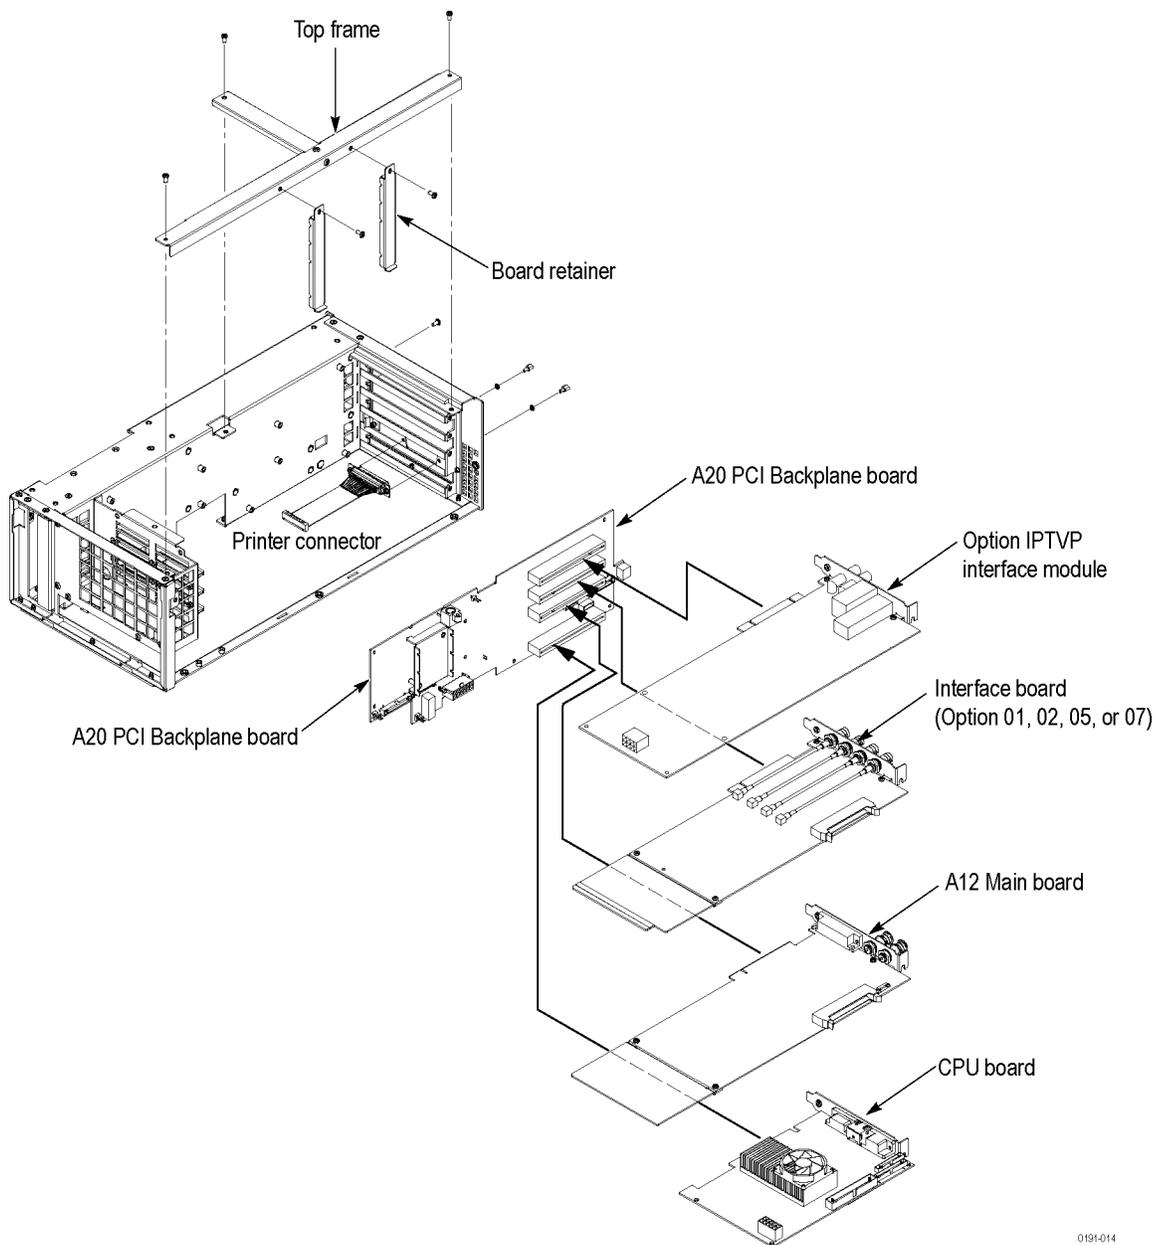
Interface modules, A12 Main board, CPU board, and A20 PCI Backplane board removal
